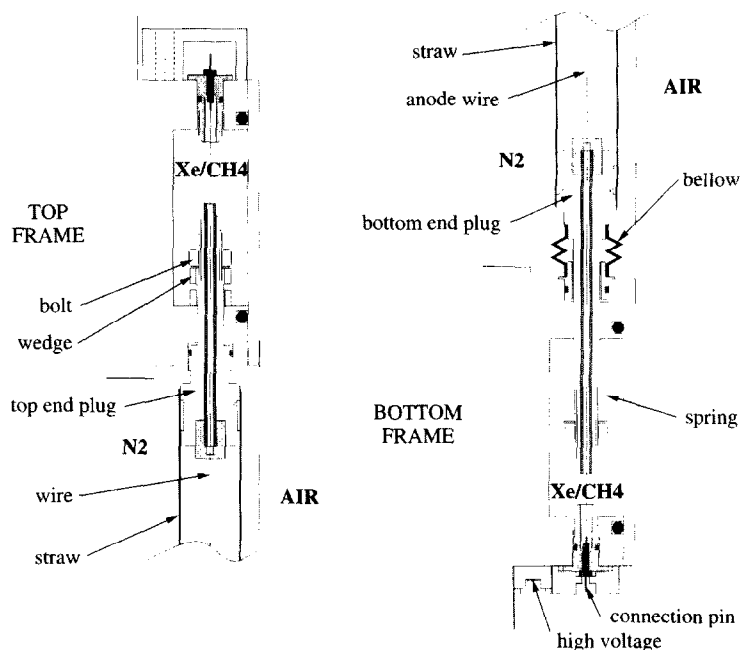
Assembly of the straws and wires in the TRD frame (top and bottom cut views).
